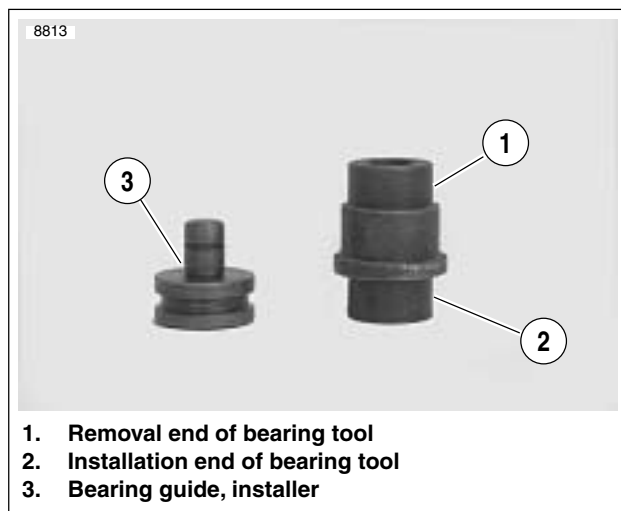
Clutch Shell Bearing Remover/Installer B-45926
